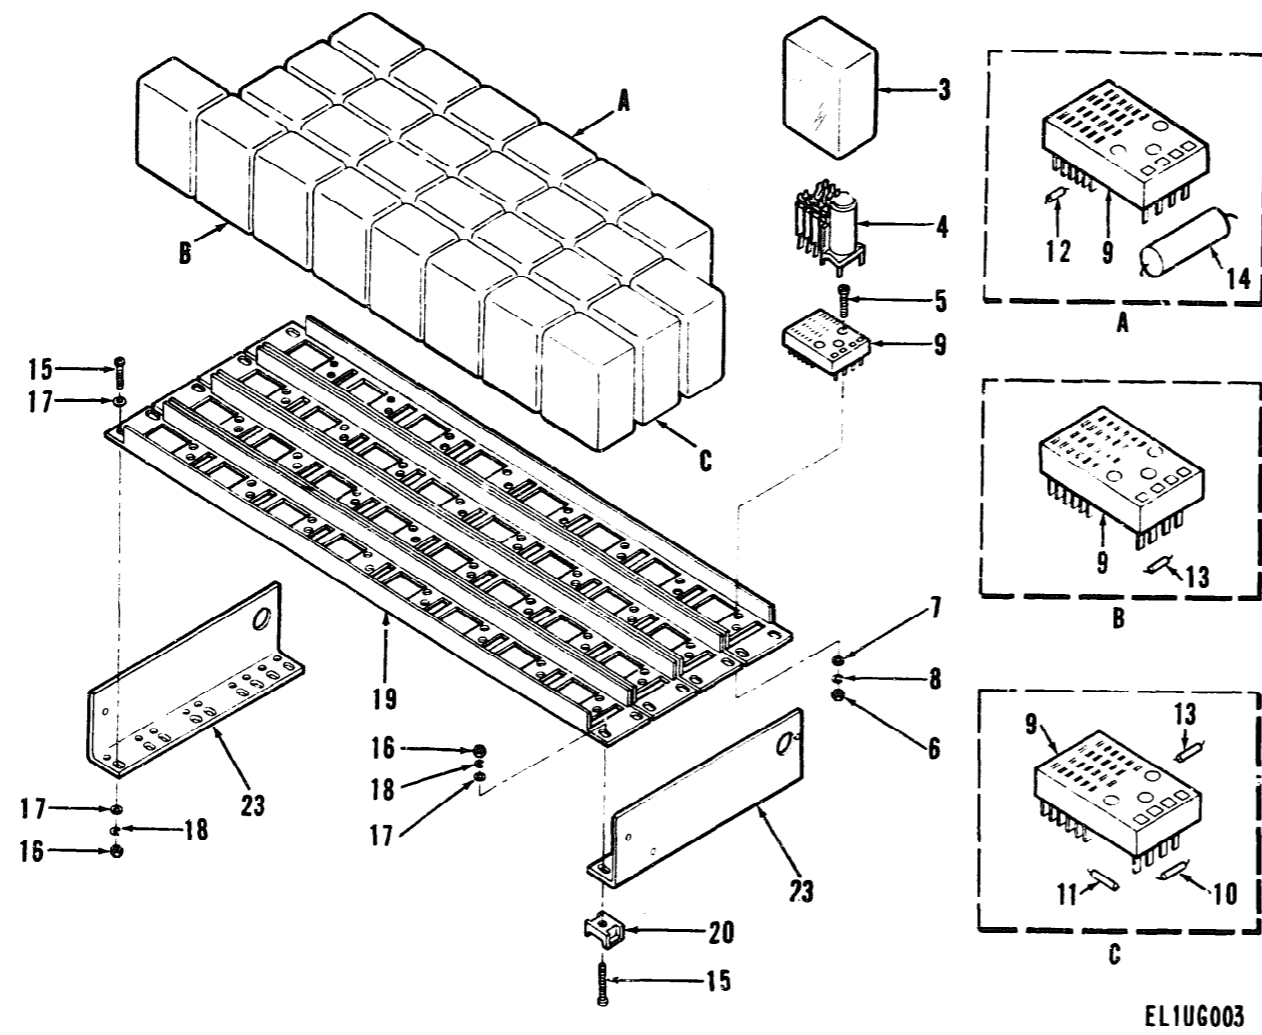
Logic Box, chassis mounted parts (Sheet 2 of 2).
